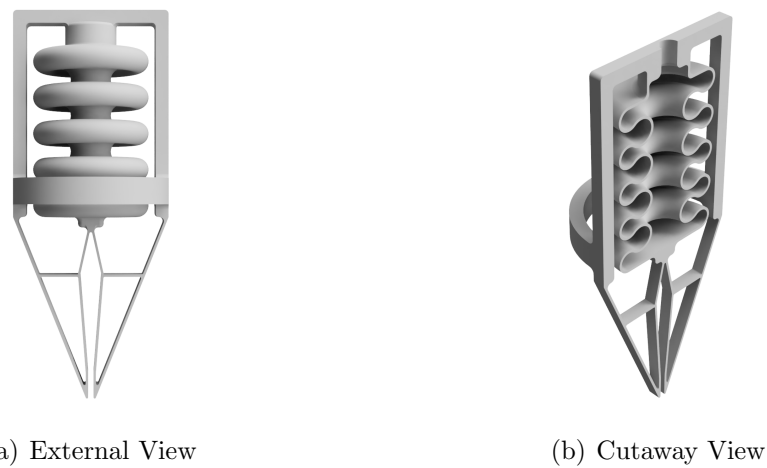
Gripper Mechanism with Embedded Pneumatic Actuator (3D CAD Model)
